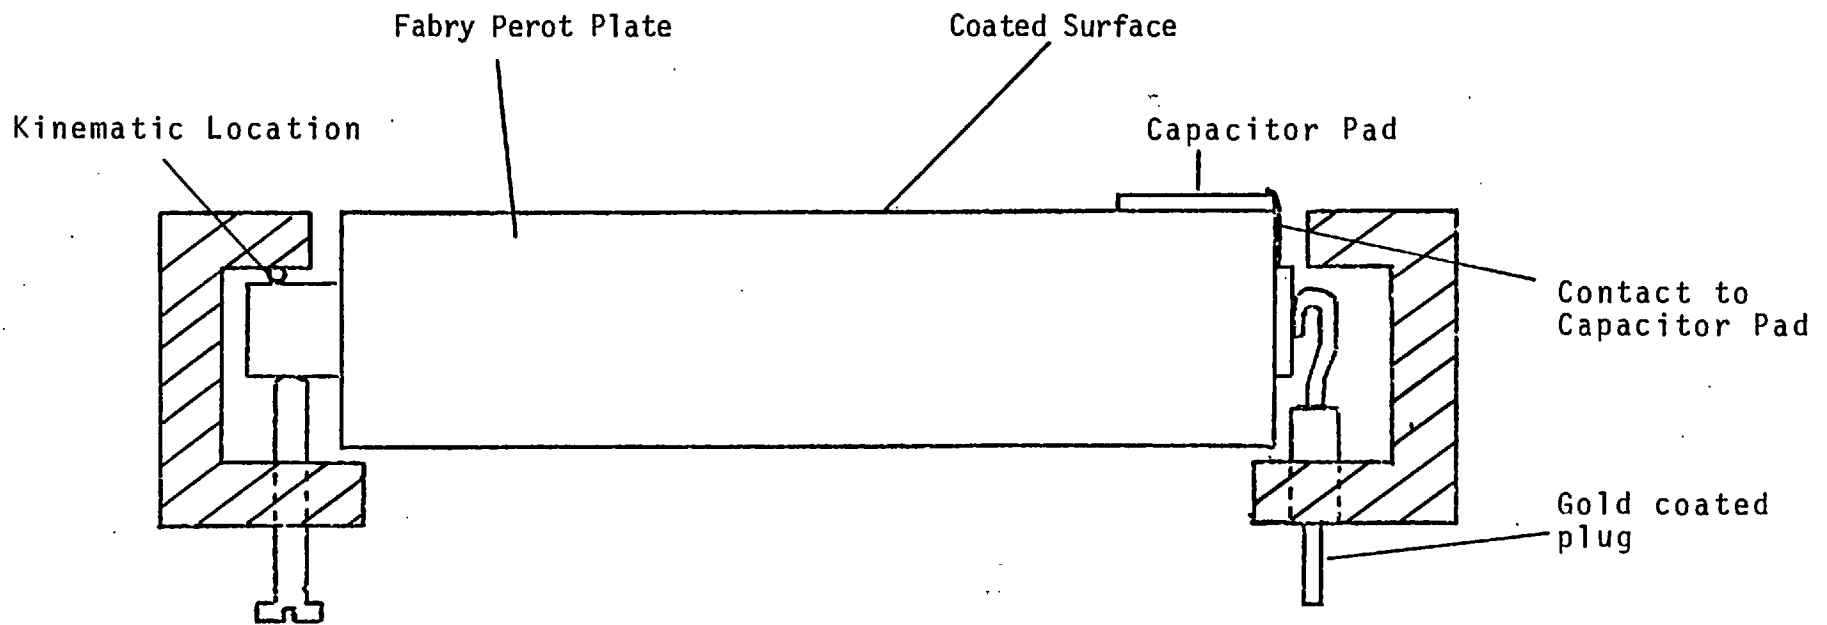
CELL FOR SUPPORTING F.P. PLATE
